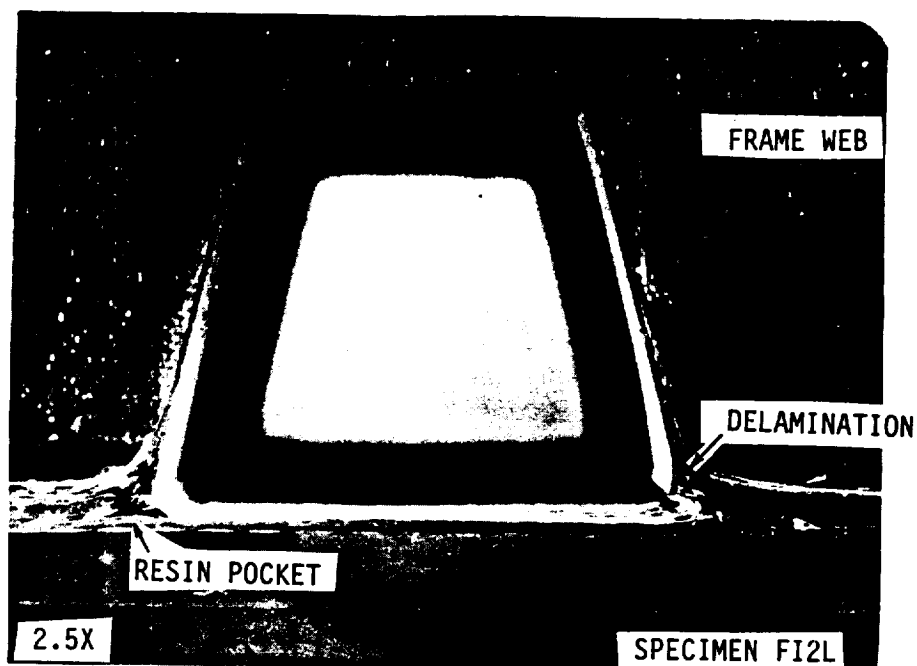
HAT STIFFENER CROSS SECTIONS NEAR FRAME STIFFENER INTERSECTION CORNERS
